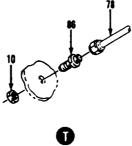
Tubing Installation (Sheet 7 of 17)
